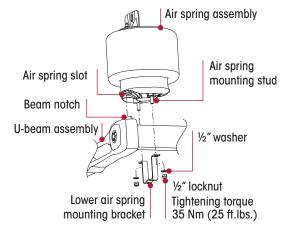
PRIMAAX EX Air Spring - Integrated End Cap
